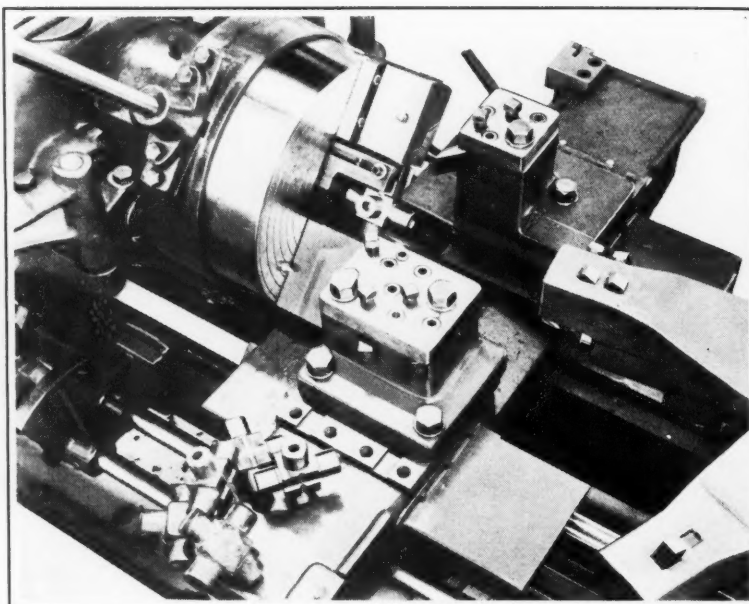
Chuck that Automatically Indexes Each Arm of Cross into Position for Machining with the Tools Illustrated
